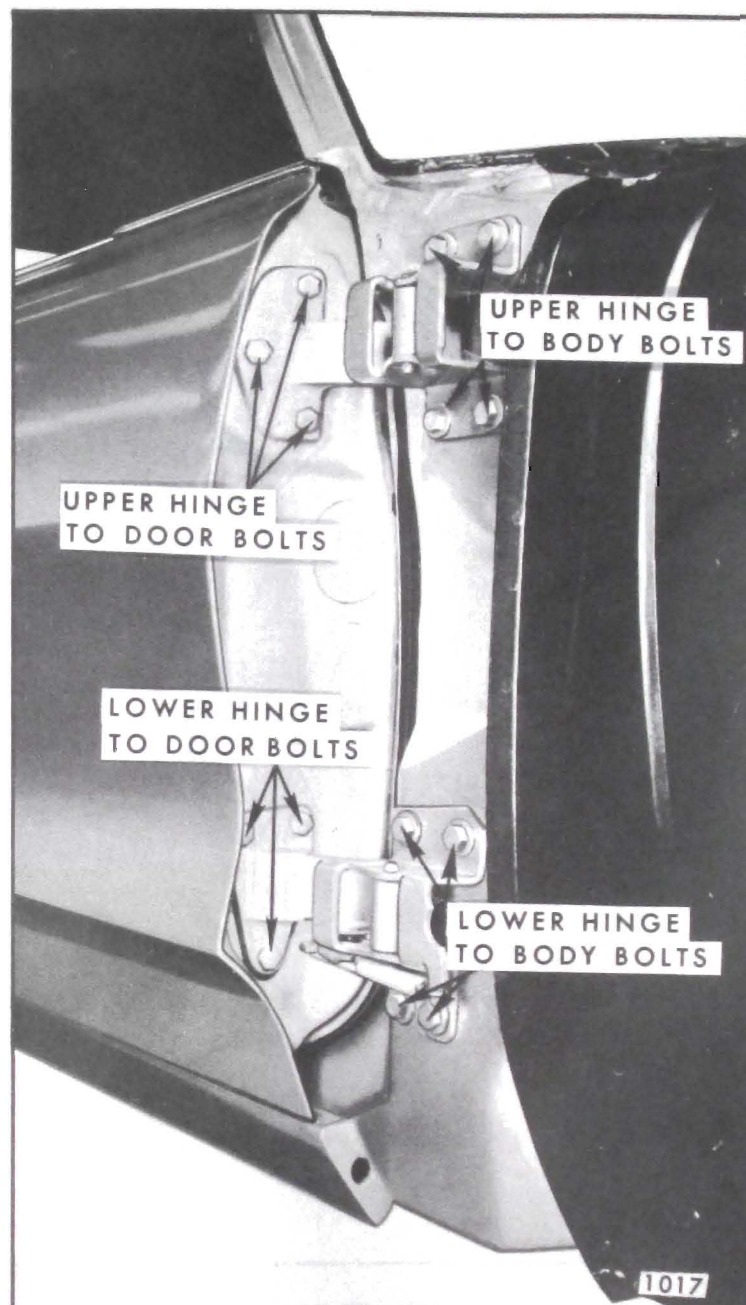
Front Door Hinge Attachment - "B-C and E" Styles
